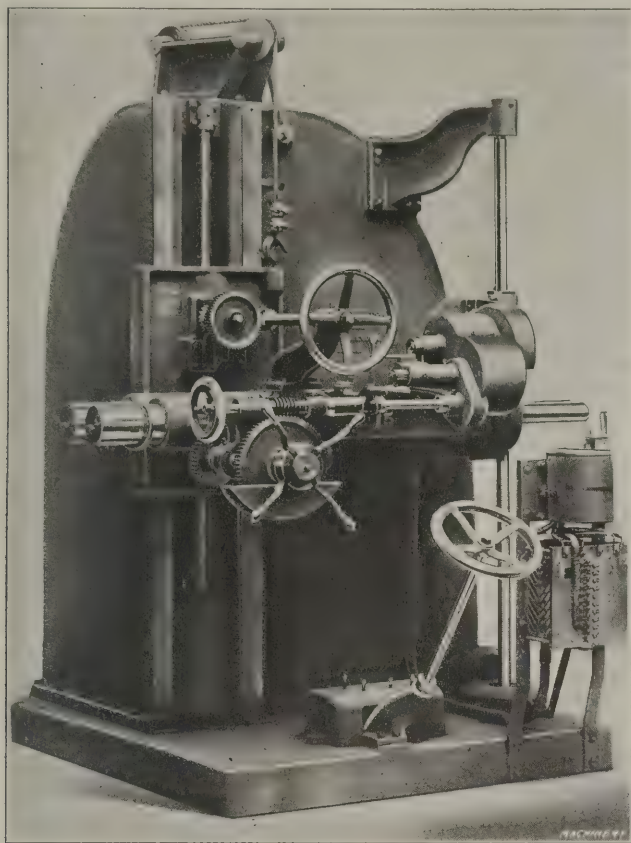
Foote-Burt Special Drilling Machine for Canal Gates
